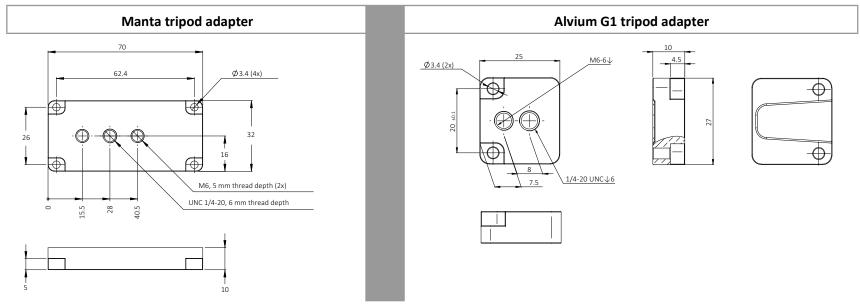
Technical drawings mounting adapters | Manta versus Alvium G1
